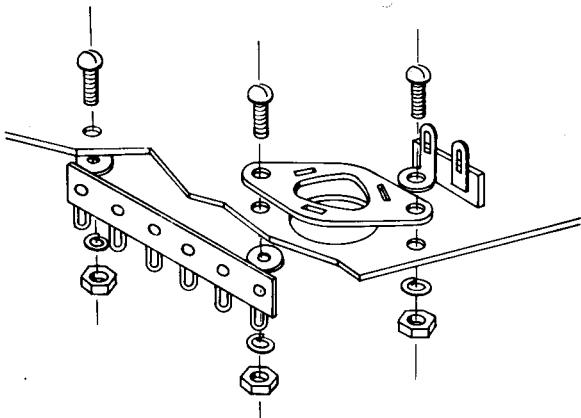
How to mount the mounting wafer for the electrolytic capacitor. The two-lug terminal strip goes above the chassis, and the six-lug terminal strip beneath the chassis.
